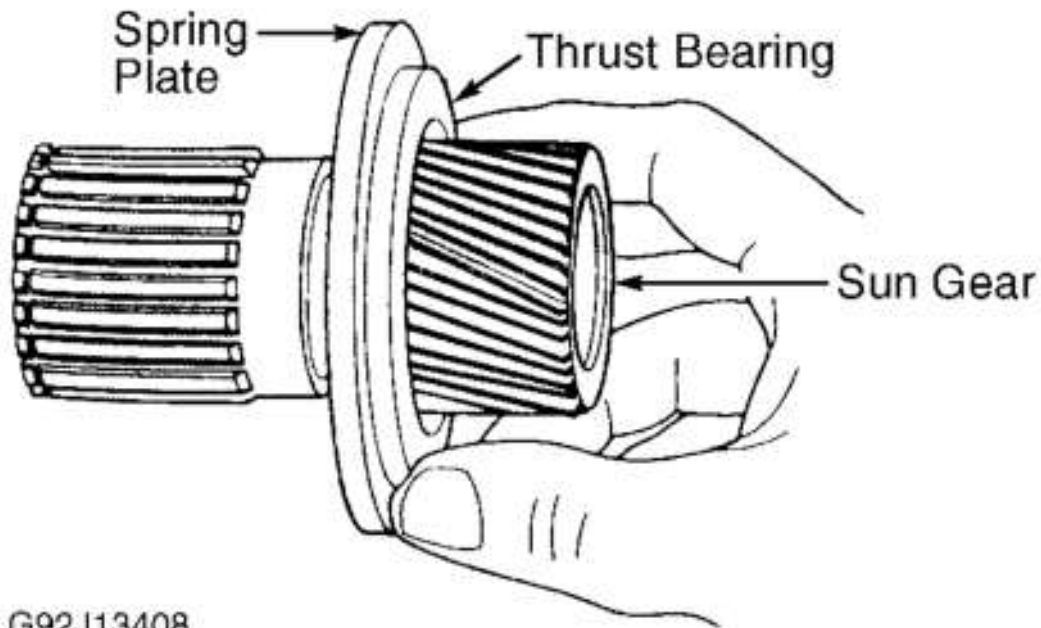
Installing Spring Plate & Thrust Bearing On Sun Gear
